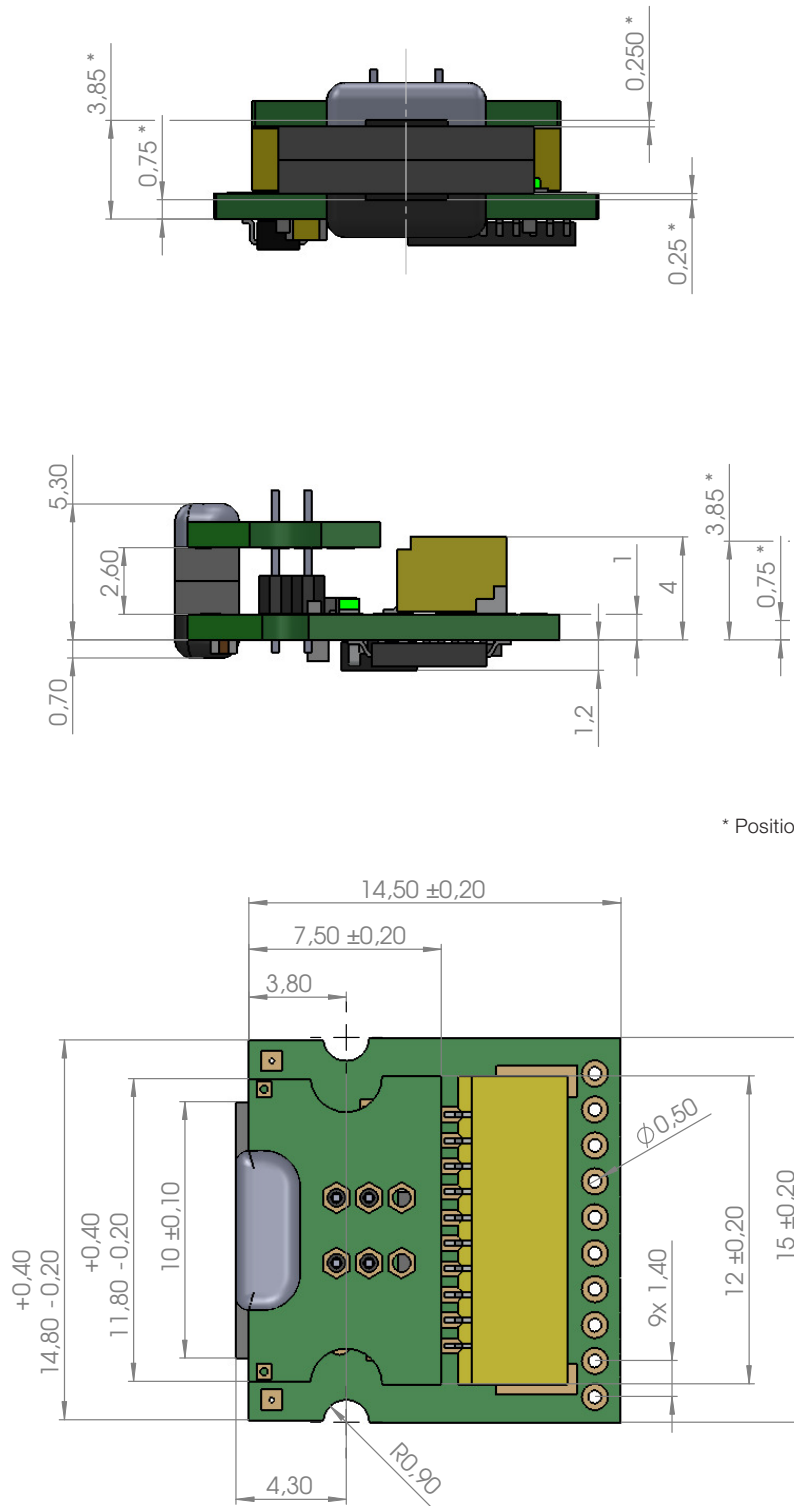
Dimensions of the sensor module (all dimensions in mm).
